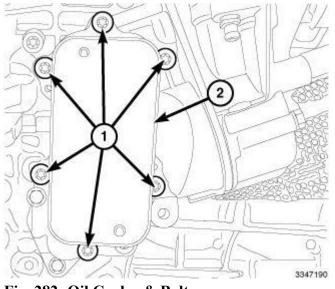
Oil Cooler & Bolts Courtesy of CHRYSLER GROUP, LLC
